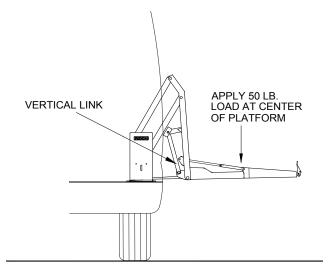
PRESSURE SWITCH TEST AT FLOOR
